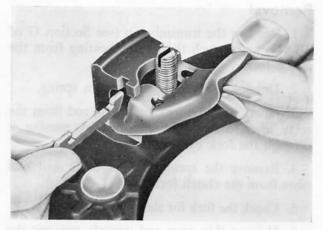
Withdrawing a strut for removal of a release lever and eye bolt
